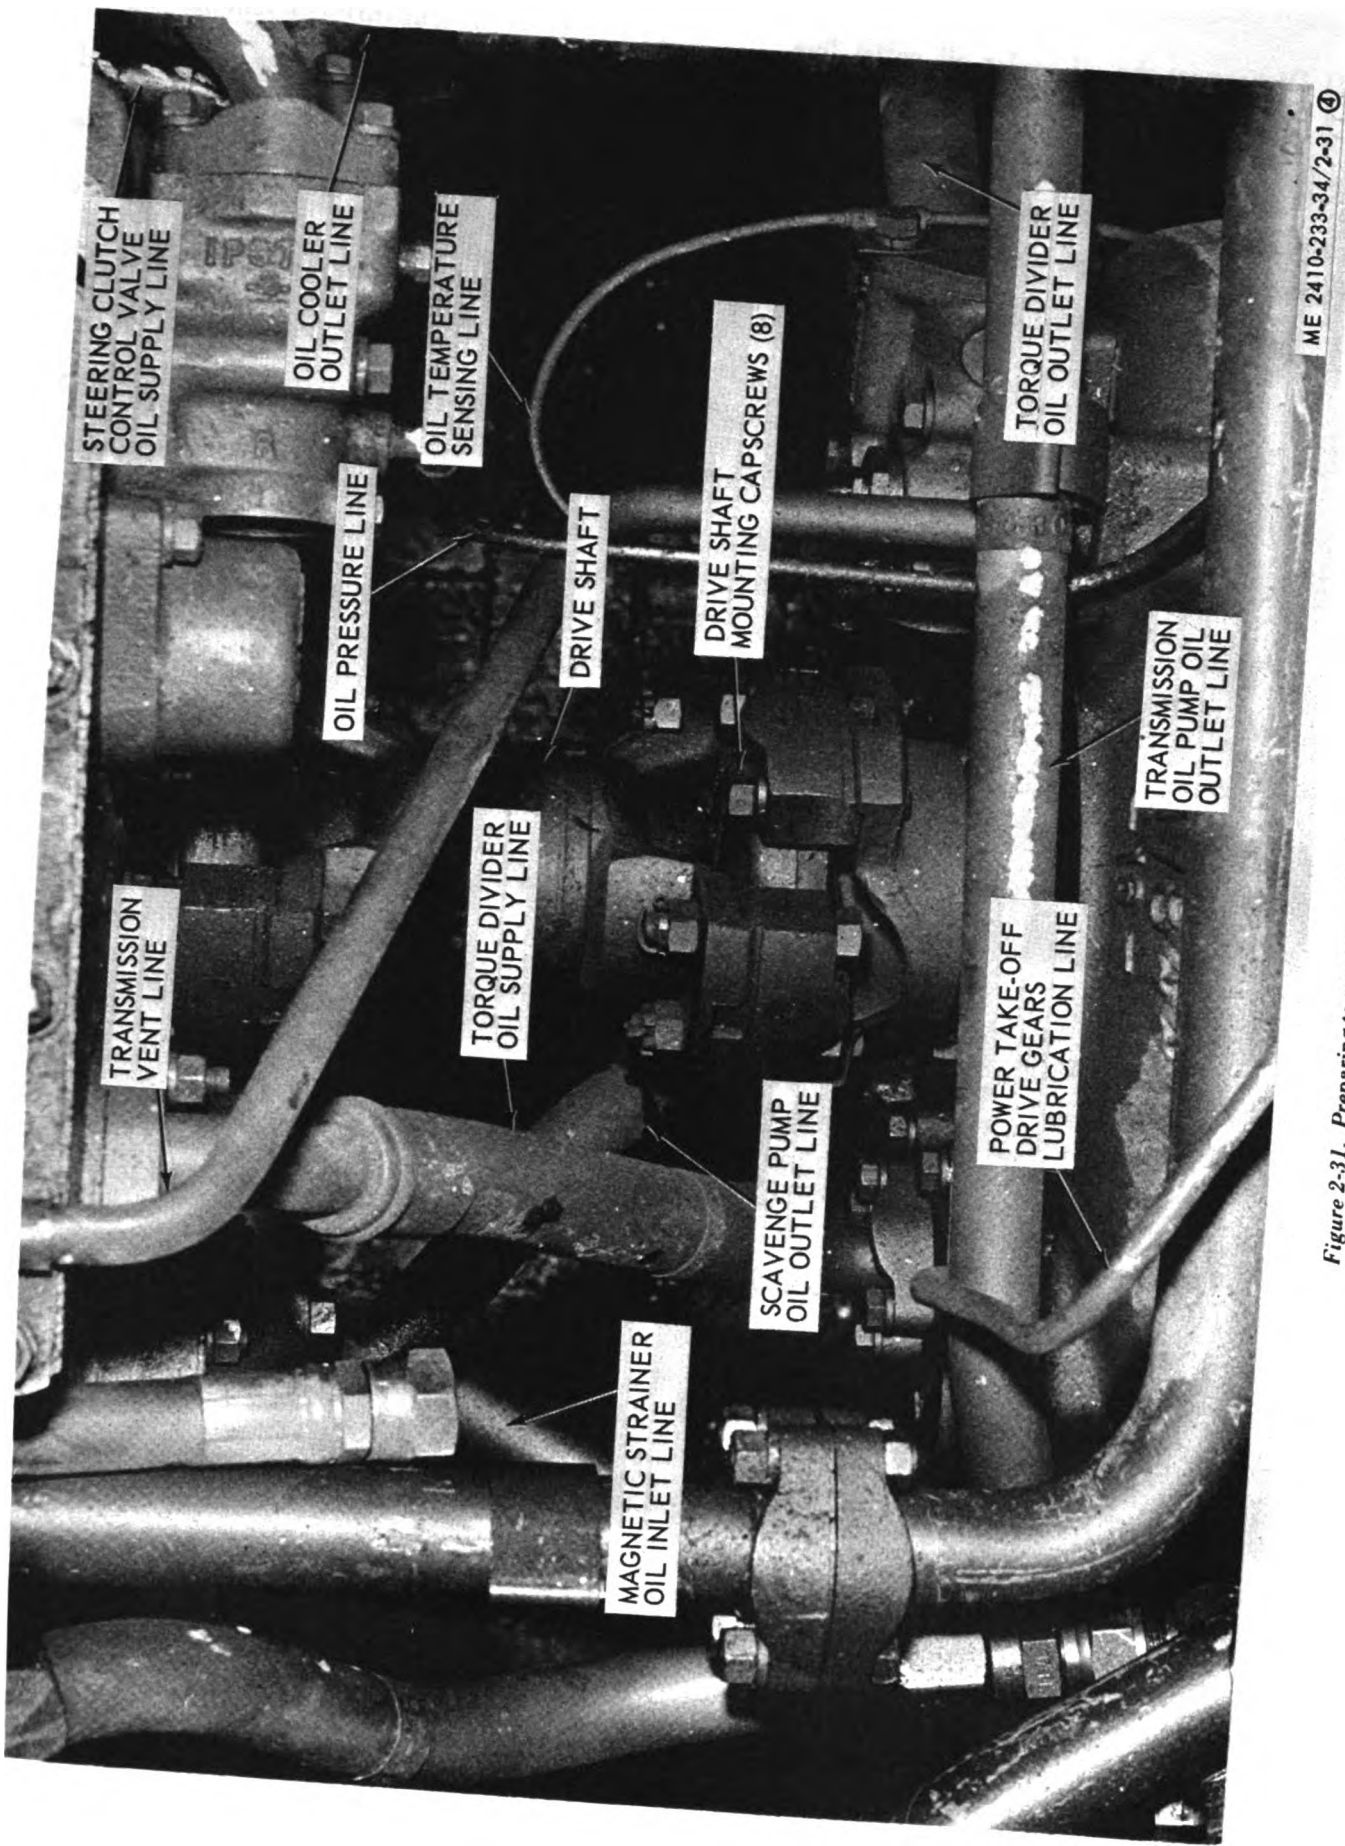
Preparing to remove engine (sheet 4 of 6).
